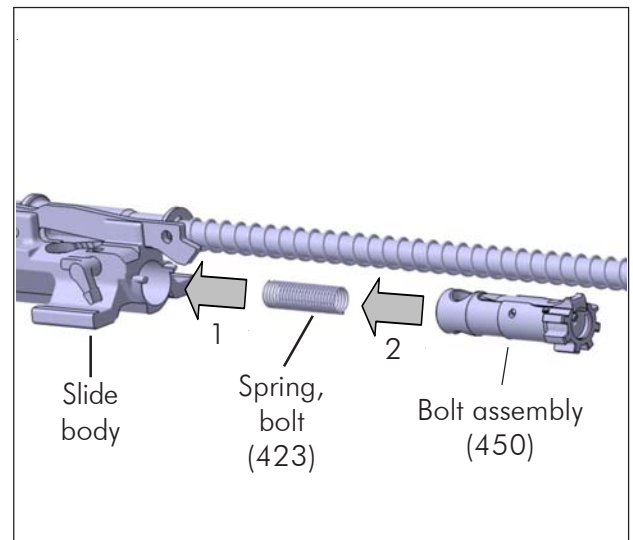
c - Reassembly of the spring, bolt (423)
